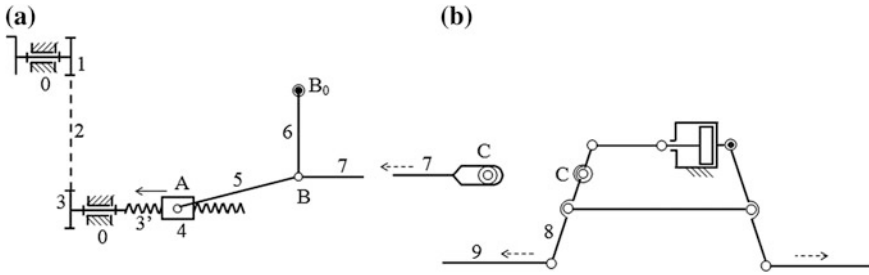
The kinematic scheme of the brake mechanism with Gall chain and motion screw
